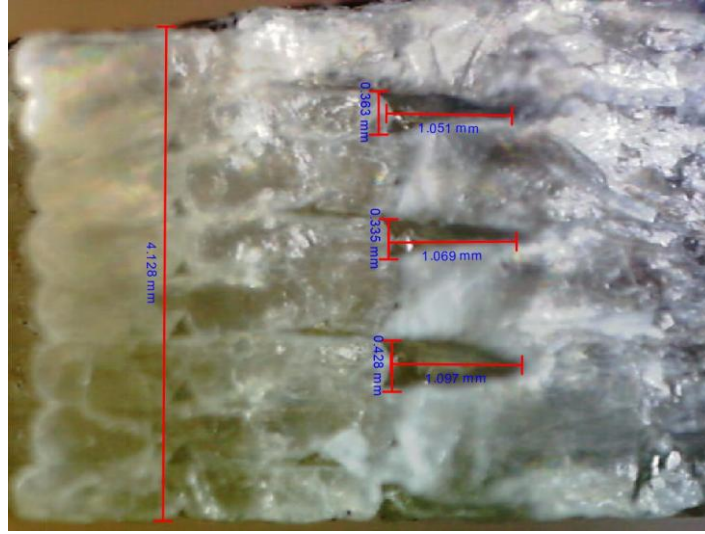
Microscopic images of fracture surfaces highlighting interlayer delamination and voids (specimen 11).
